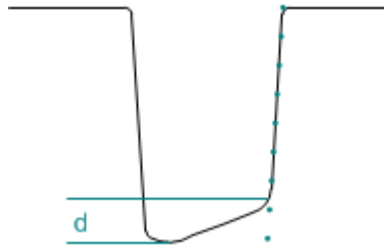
Example of a flat asymmetric weld profile.
